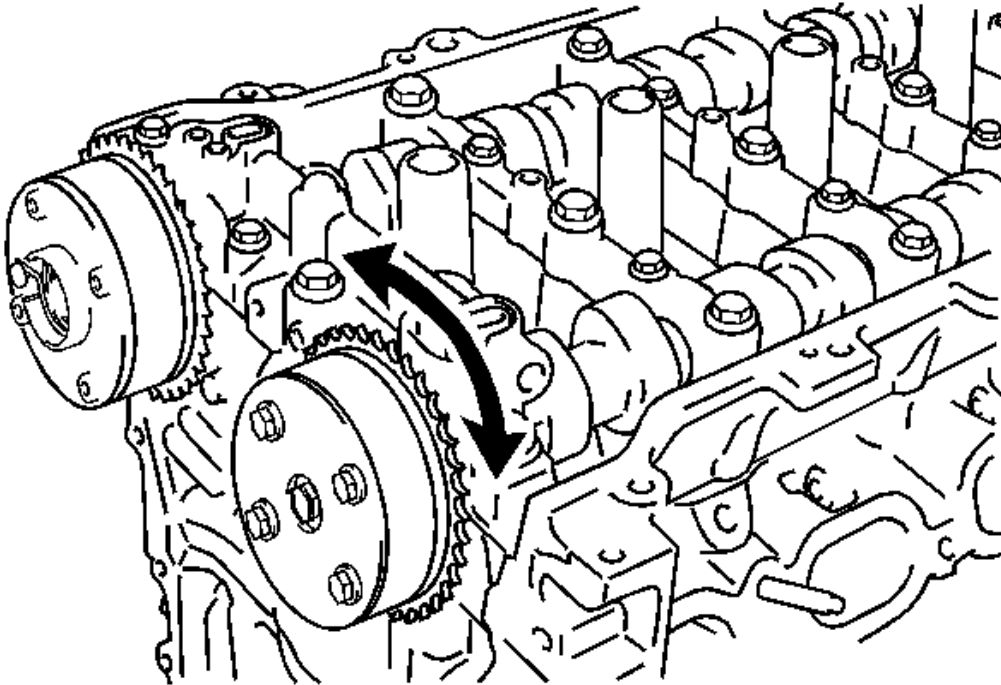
Checking Camshaft Timing Gear Assembly For Smooth Turning Ability
